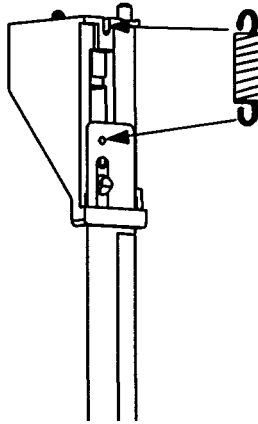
Removing the Encoder Strip Tensioner Spring
